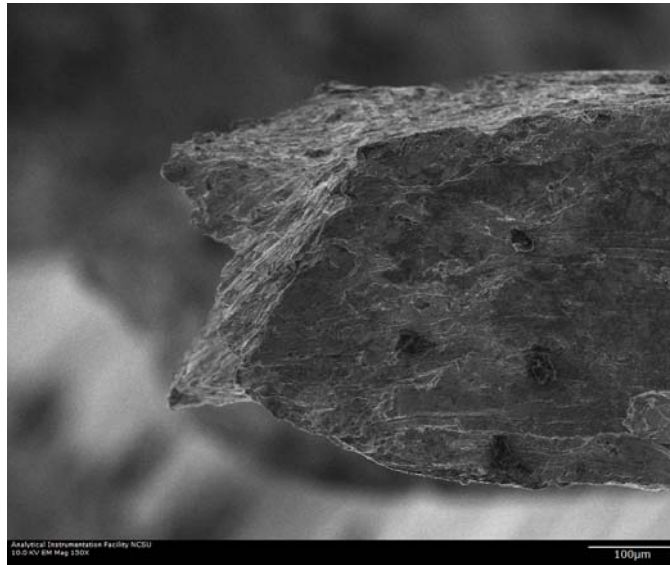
Surface topography of fractured MG-copper showing the cup side of the fracture surface occurring in ductile fracture.
